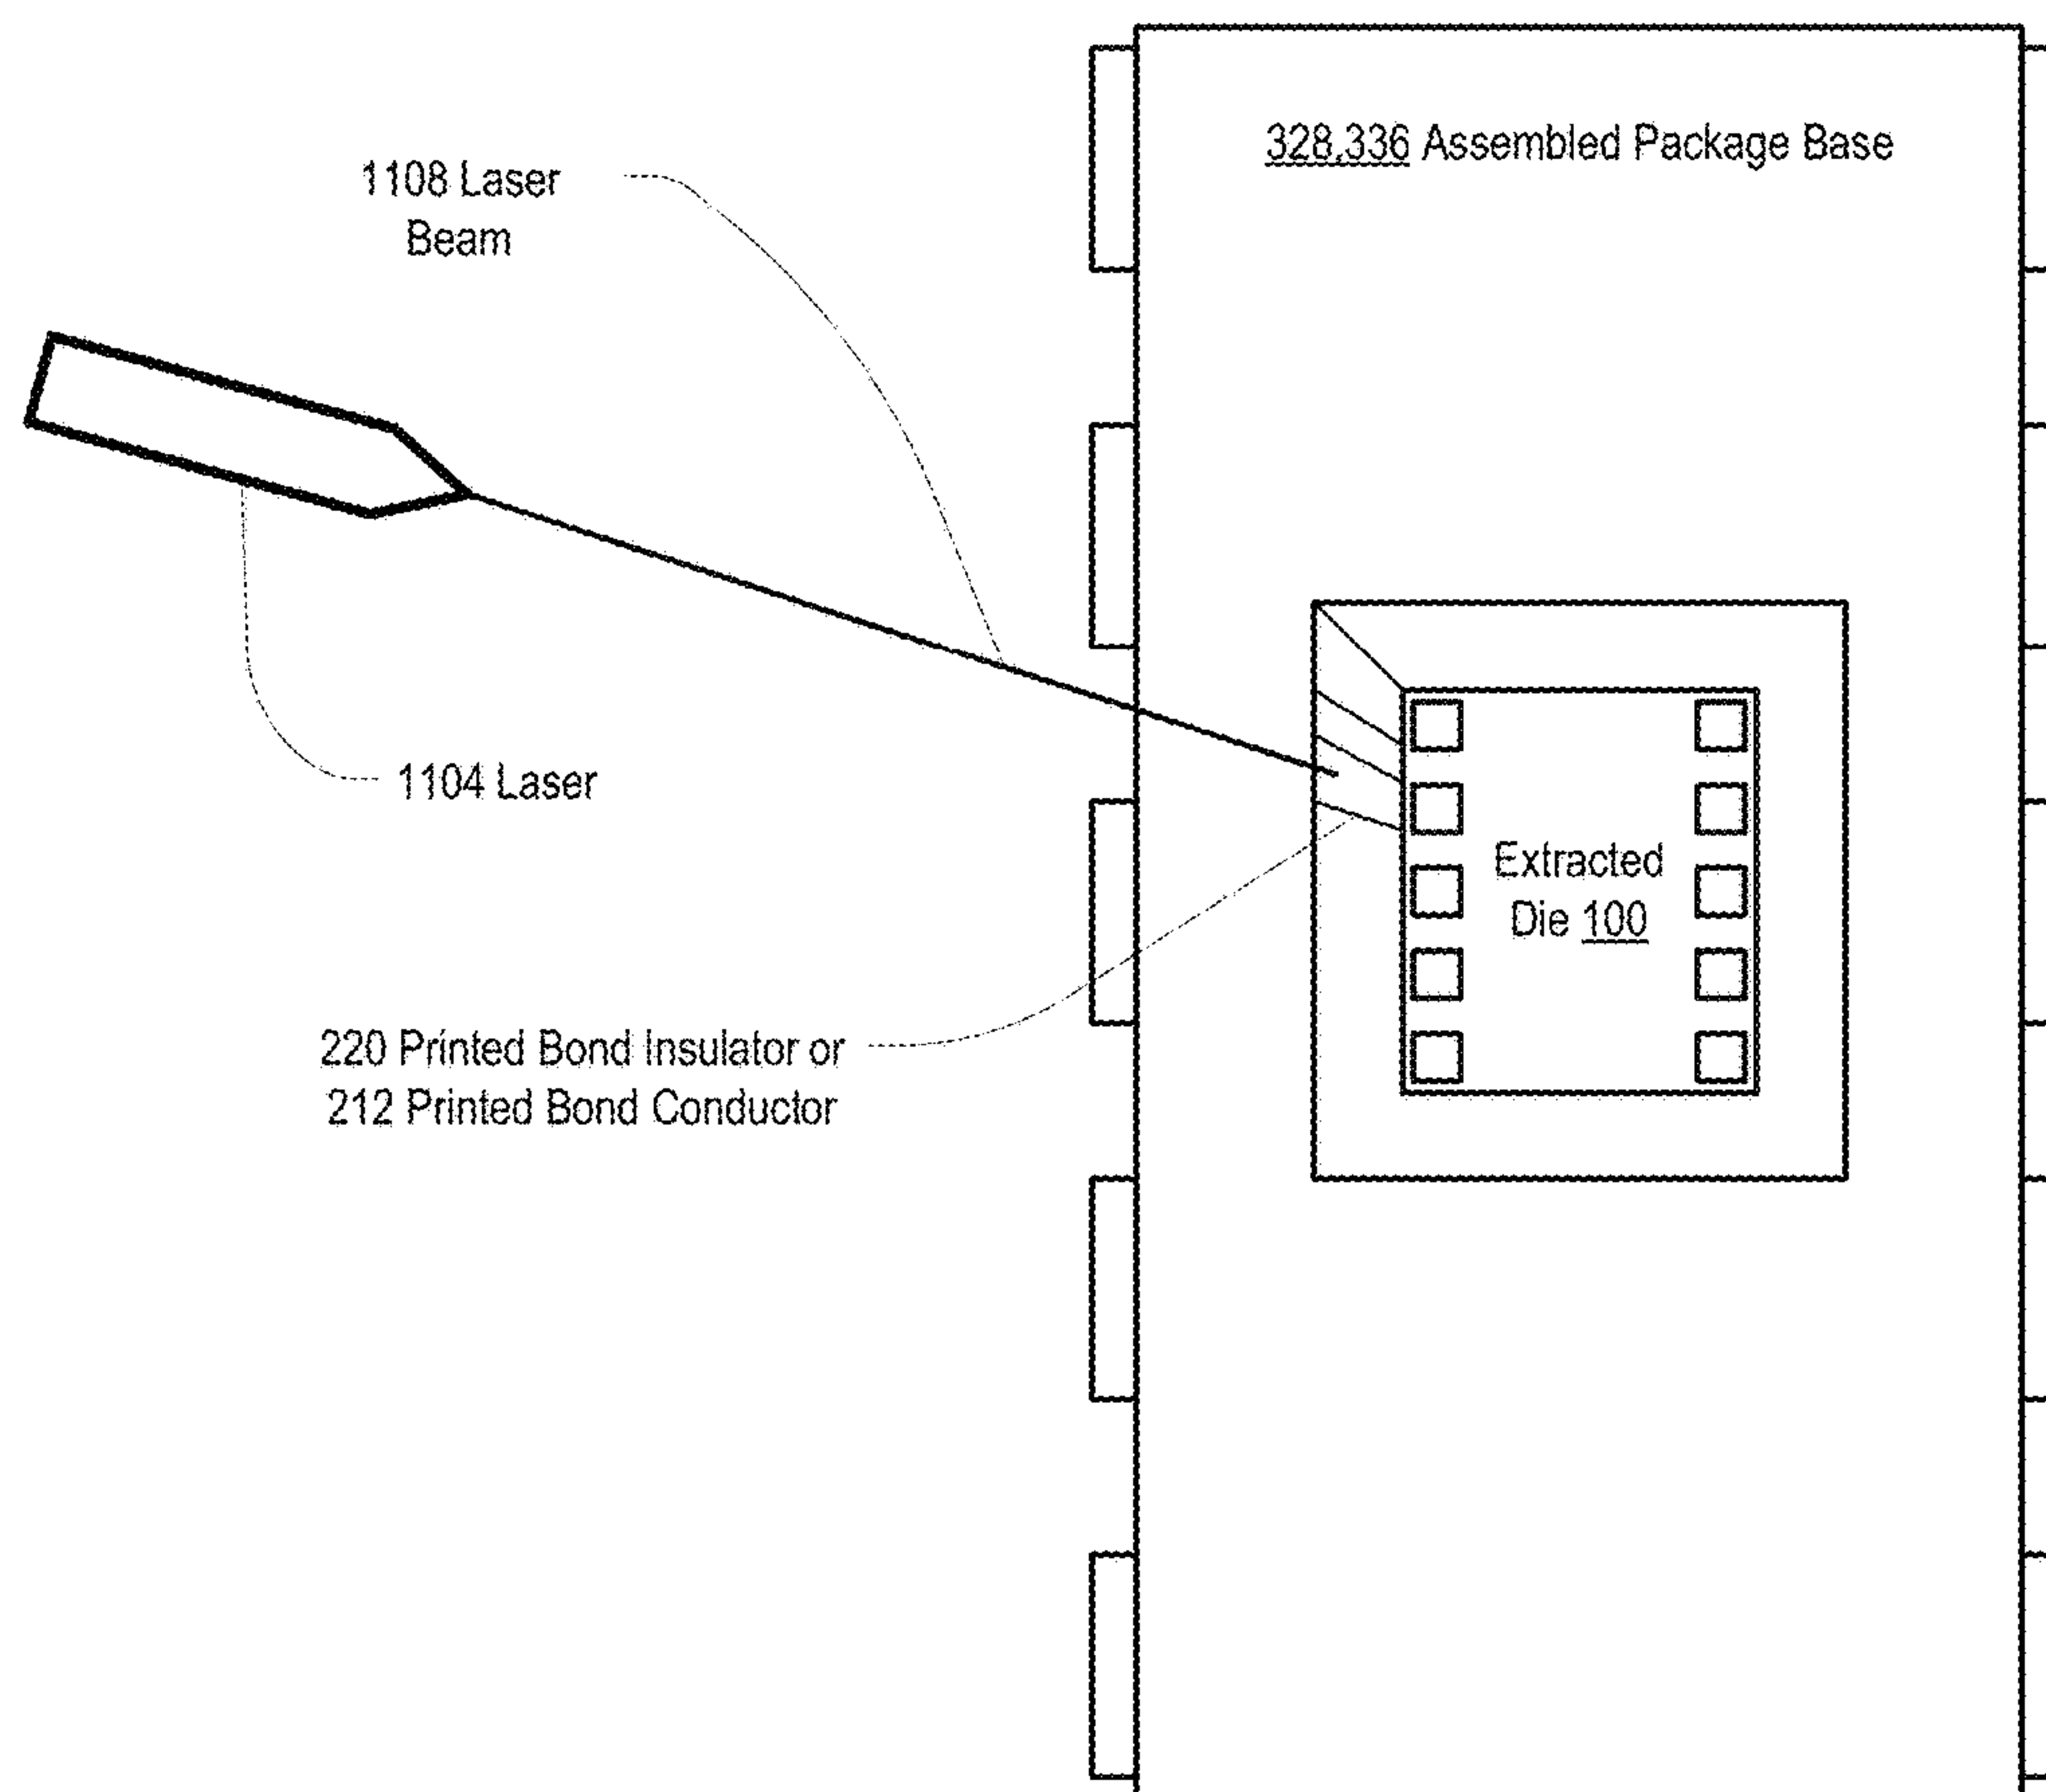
Sintering Process to Form Printed Bond Insulator or Printed Bond Conductor
